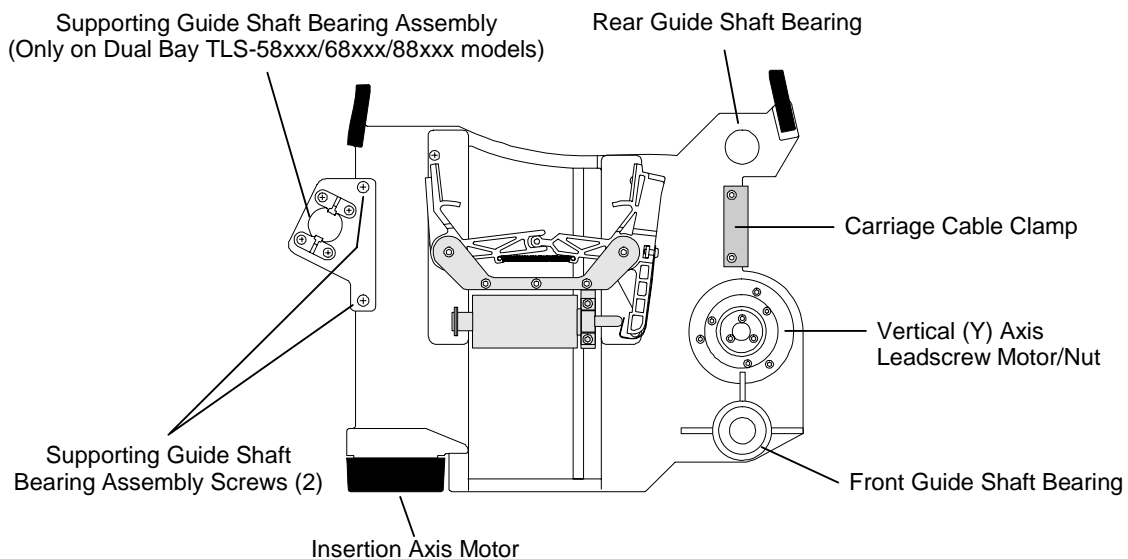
TLS Carriage Assembly P/N 501196-01-8
